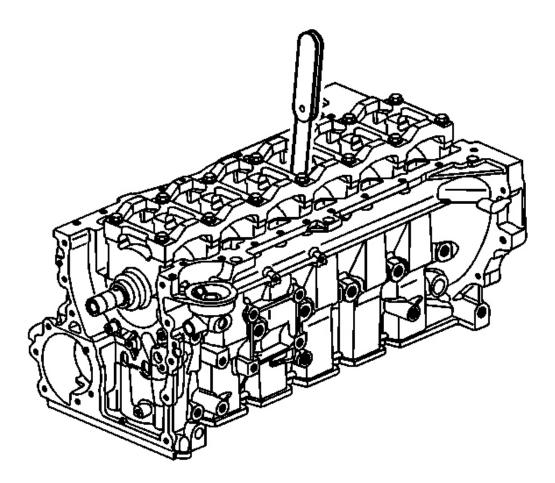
Measuring Crankshaft End Play Courtesy of GENERAL MOTORS CORP.
